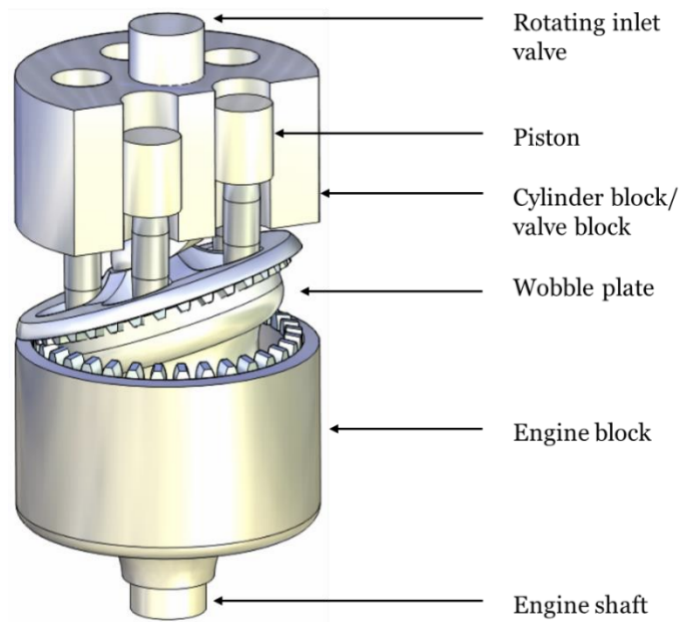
3D model of the axial piston expander used in the RANOTOR engine [9].
